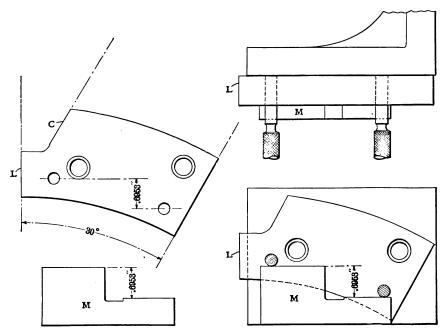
LOCATING INDEX BLOCK ON ANGLE PLATE FOR GRINDING SHORT END
